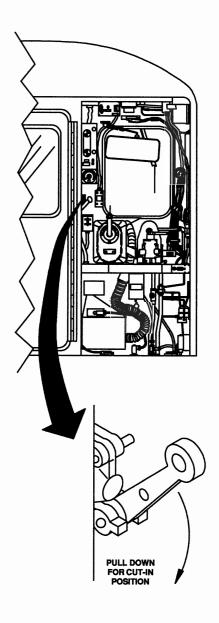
Single Car Emergency Brake Valve, in Cab
